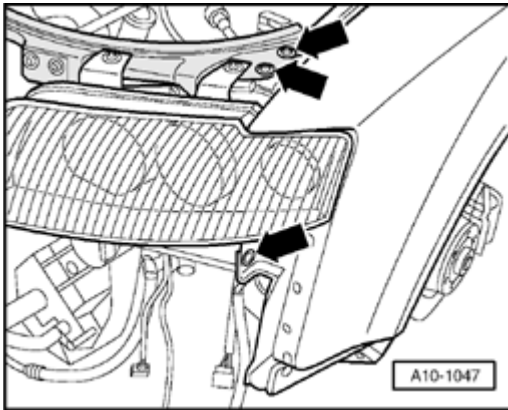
Removing Bolts At Left/Right Side Of Bumper
